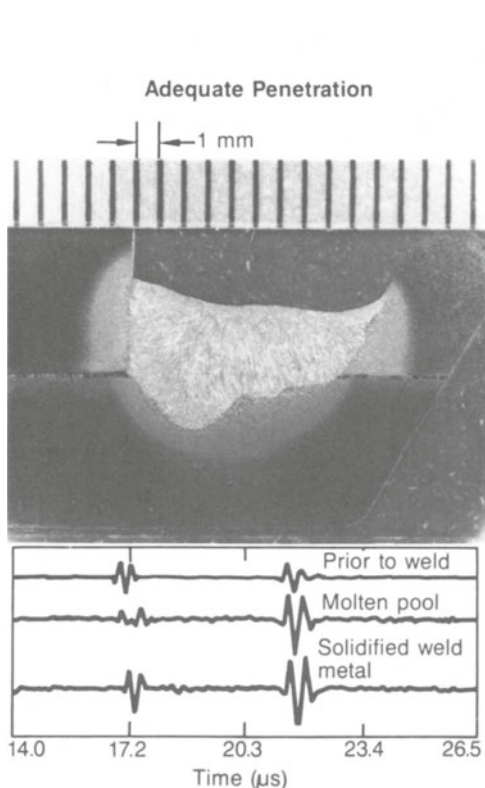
Polished and etched weld sample of adequate penetration with A scans acquired using a stationary transducer prior to welding, with molten pool, and of solidified weld metal.
